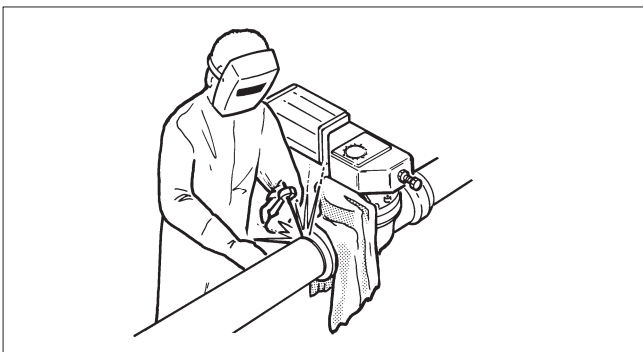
Valve body covered with wet protection cloth during welding
